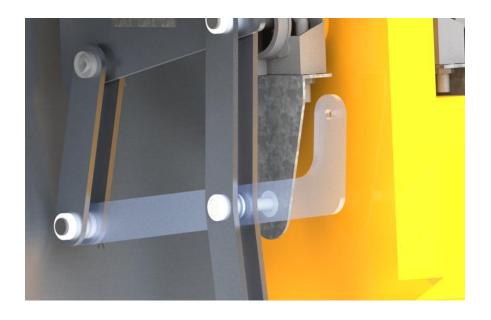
Custom actuator arm mounting the mechanism [17].
